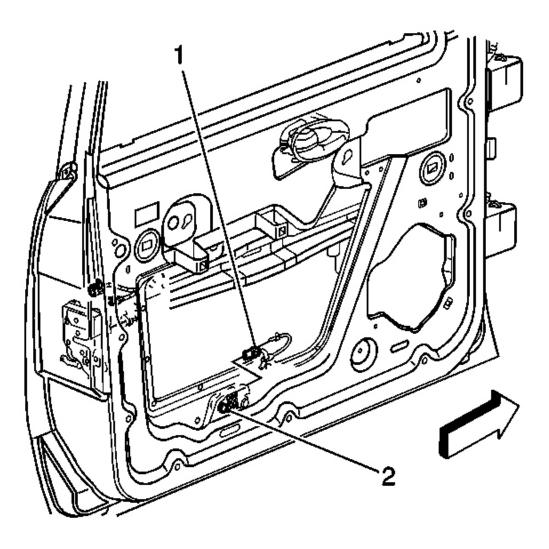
Identifying Side Impact Sensor & Electrical Connector Courtesy of GENERAL MOTORS CORP.
